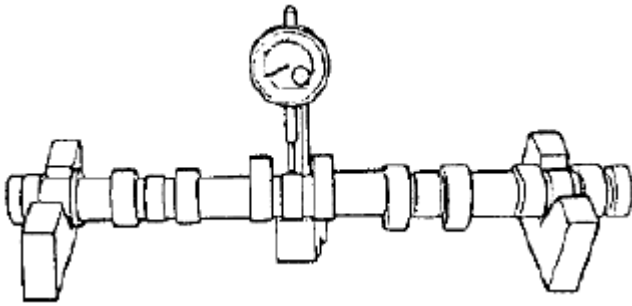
Measuring Camshaft Runout Using Dial Gauge
